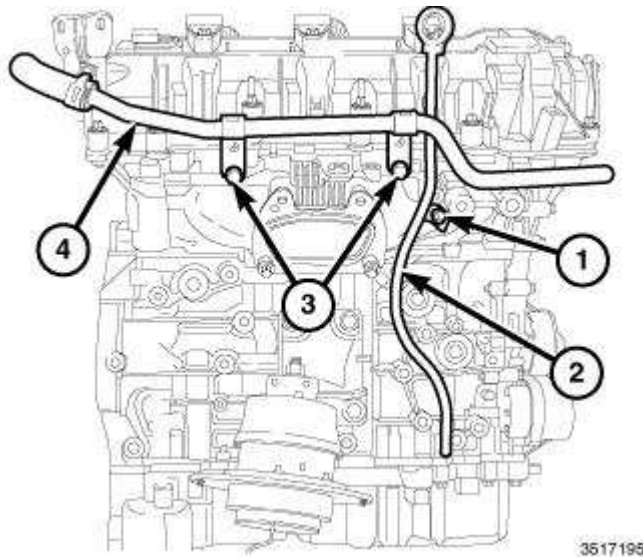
Heater Core Inlet Tube, Oil Level Indicator & Bolts
